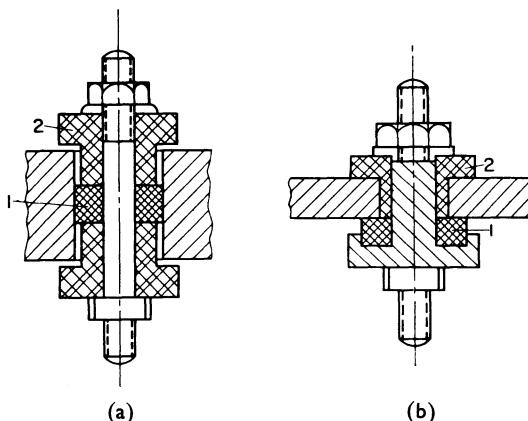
Lead-throughs, sealed with flat rubber gaskets: (a) seal with enclosed gasket, 1) rubber gasket; (2) ceramic parts; (b) seal having the gasket outside, (1) rubber gasket; (2) insulating part
